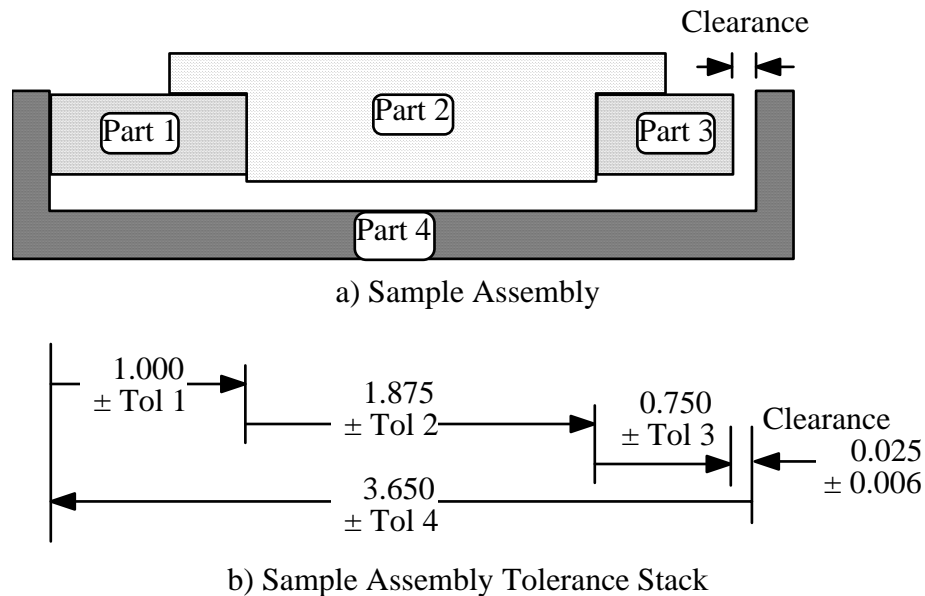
Sample Assembly for Tolerance Analysis
